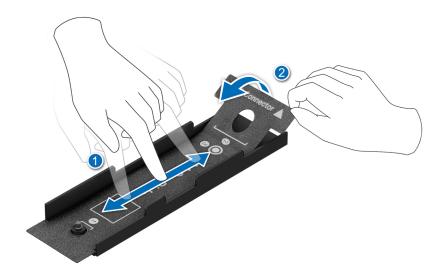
Pasting the new thermal pad inside the top cover and removing the black mylar
